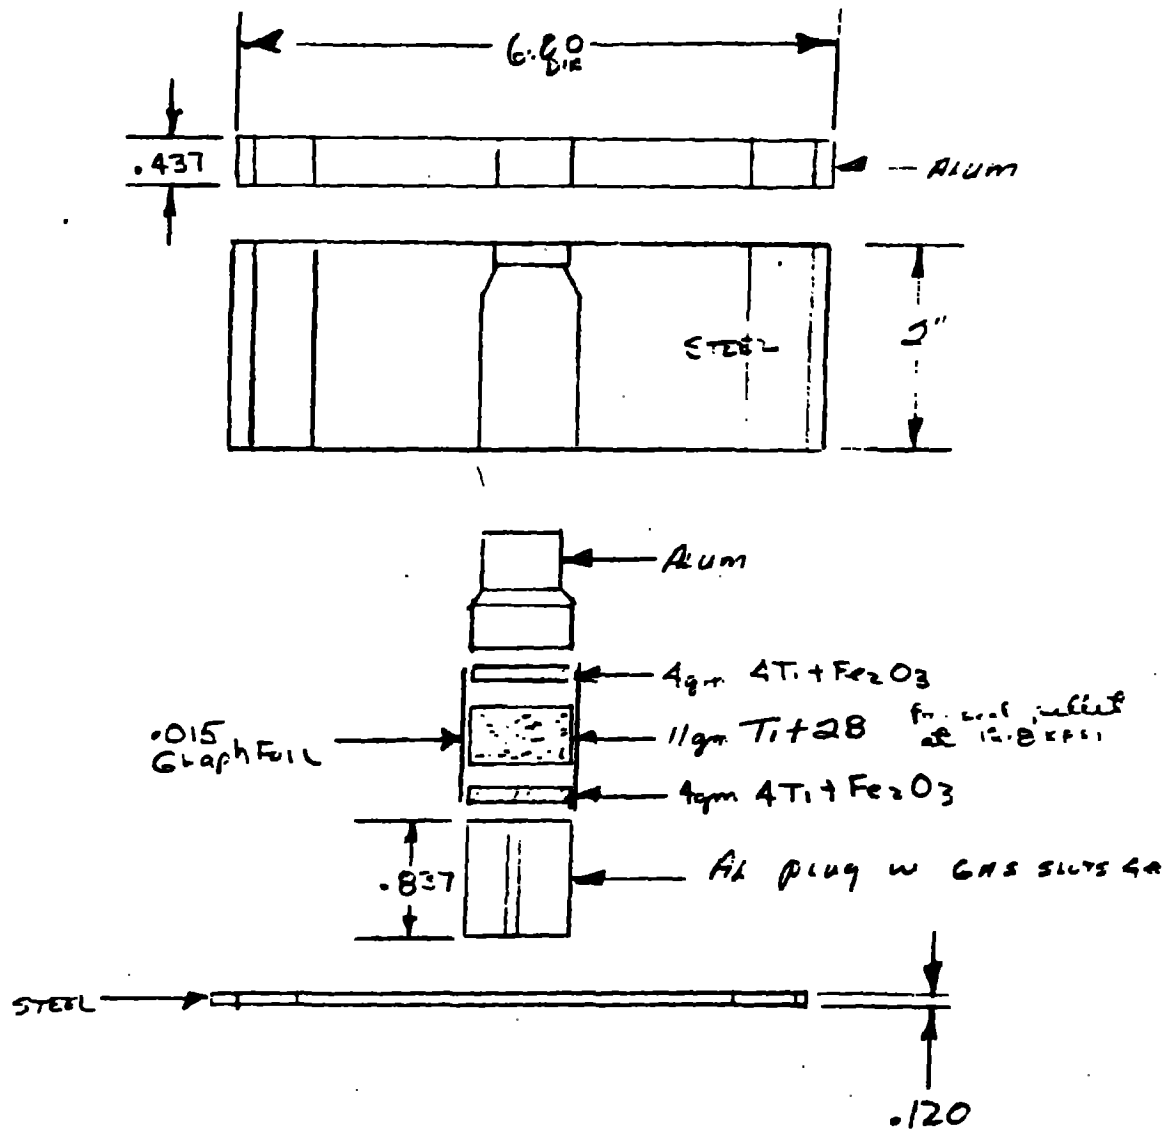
A schematic drawing of the fixture used in the experiments to initiate and densify samples of Ti-2B using HMX explosive to supply the shock wave pressure.
